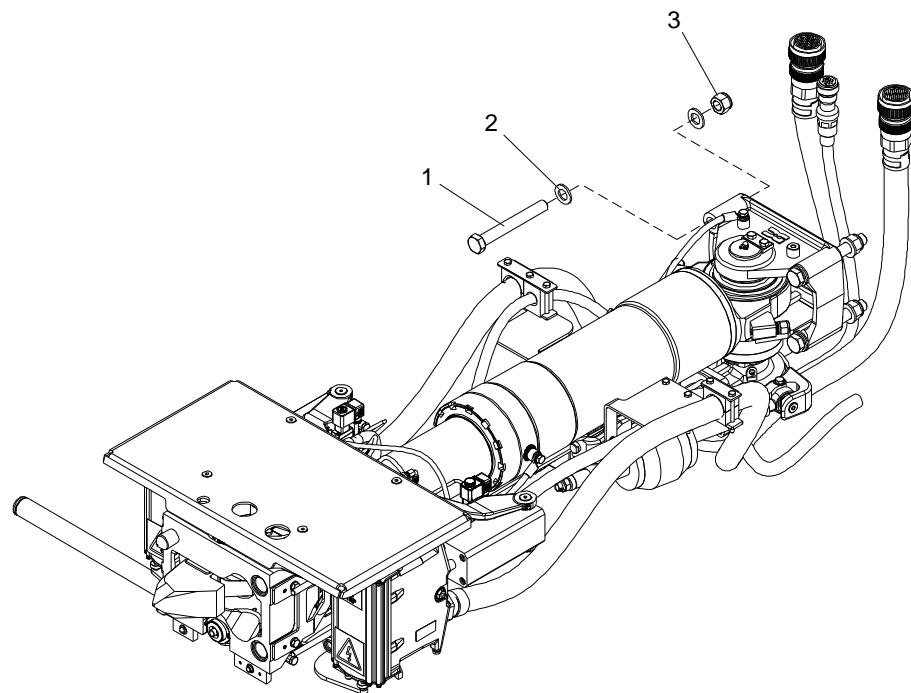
Replacement of Automatic Coupler / Mounting Kit
